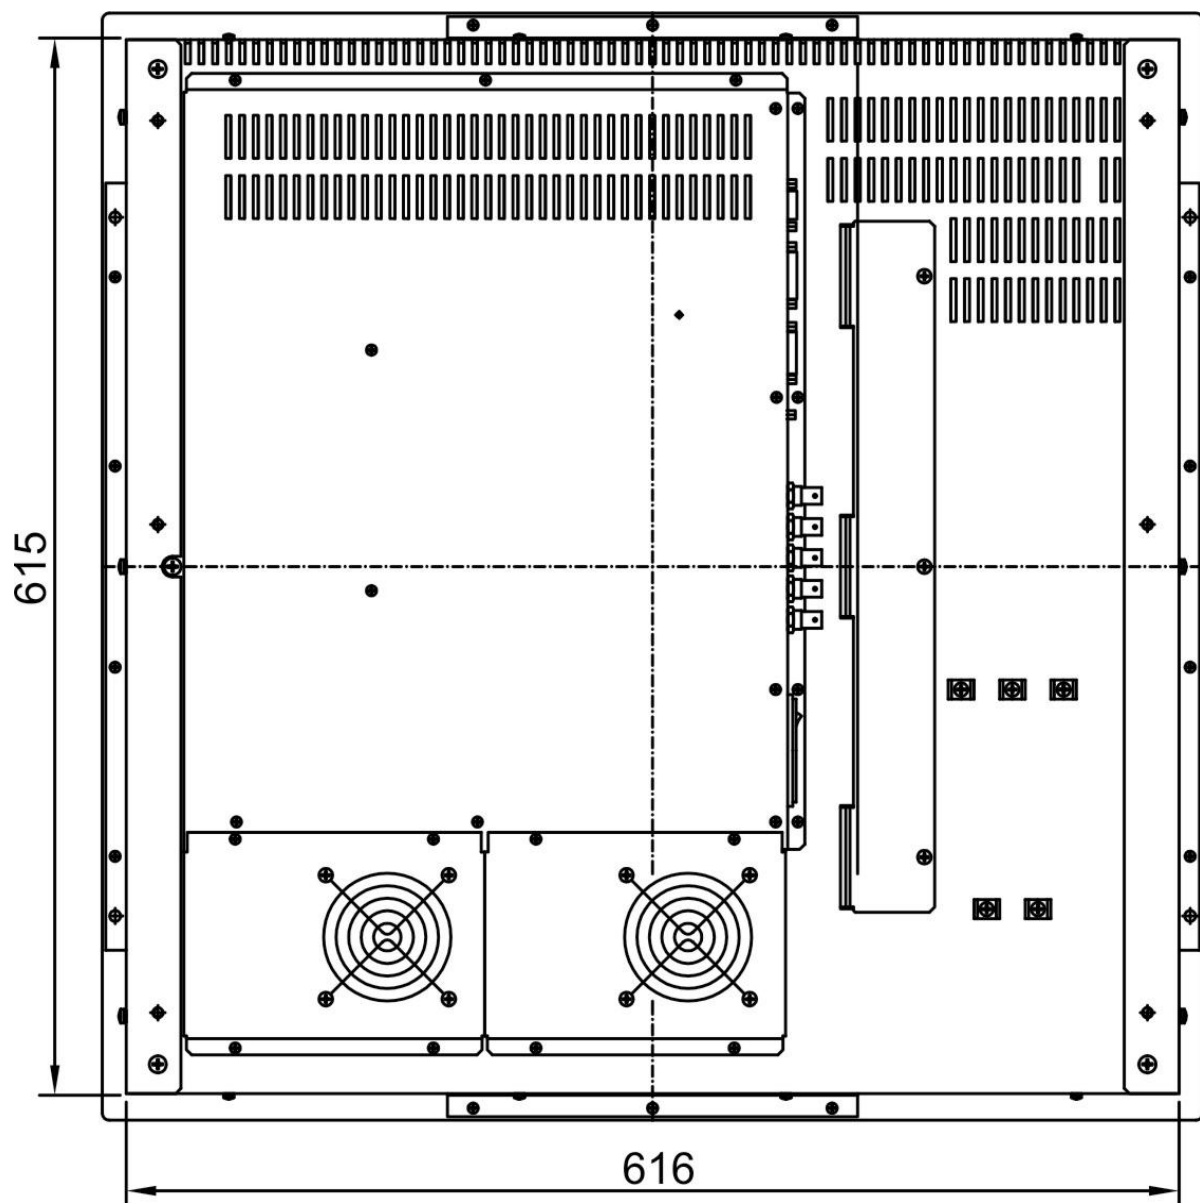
Raptor SQ2801 Dimensions (Panel mount); Side View
